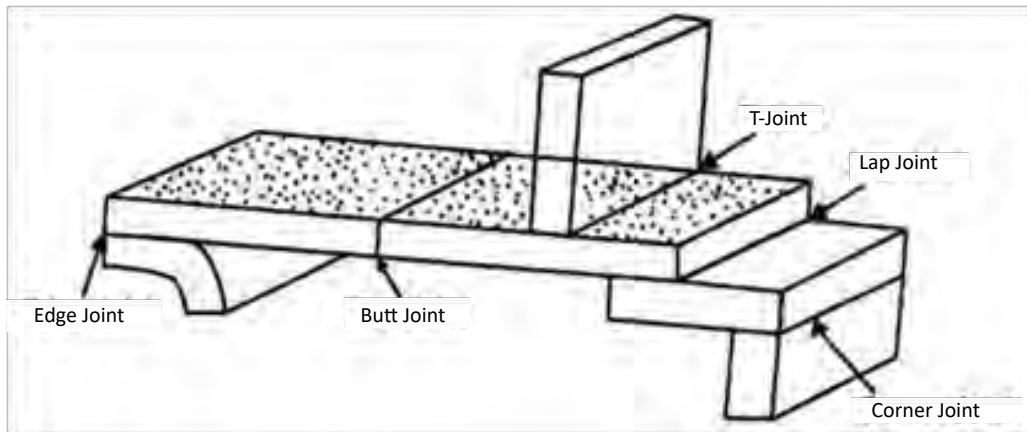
5. 30 Basic types of Welded Joints
